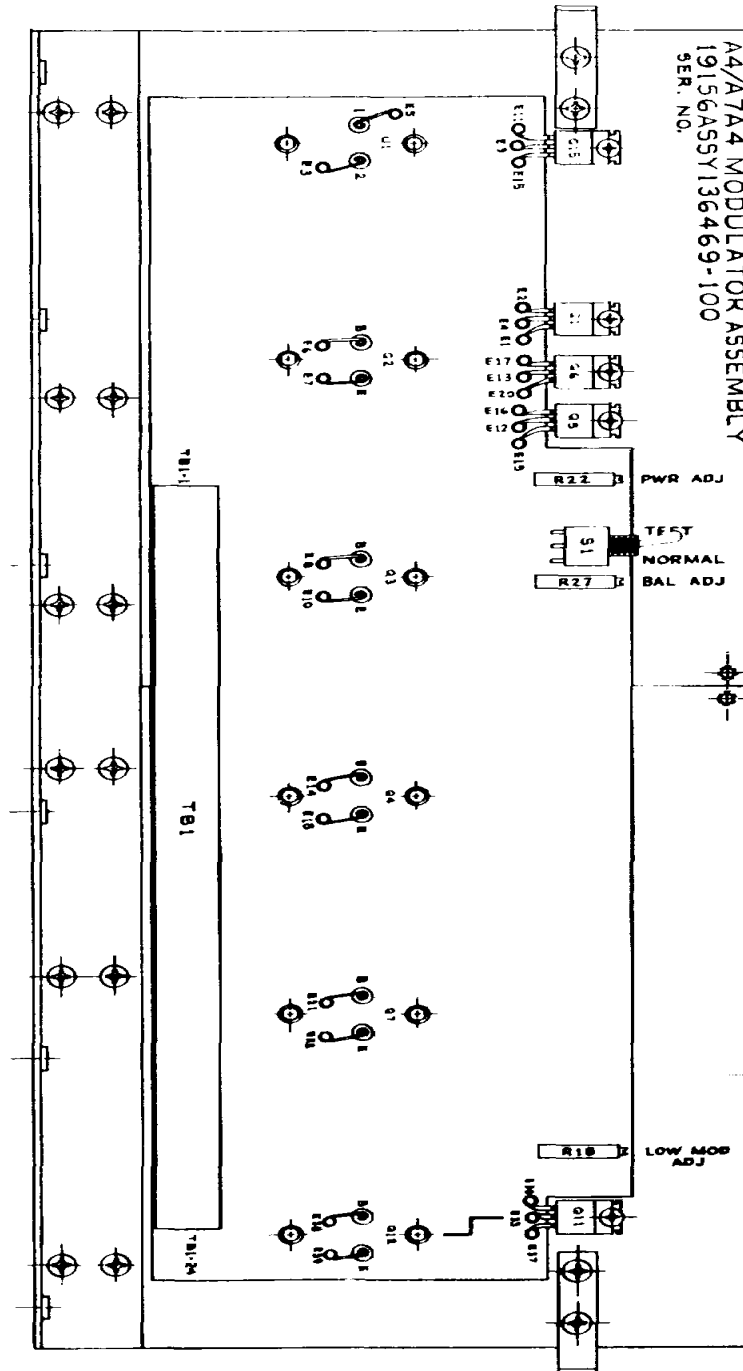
Modulator Assembly Circuit Card Assembly, 1A4A4 Parts Location Diagram
